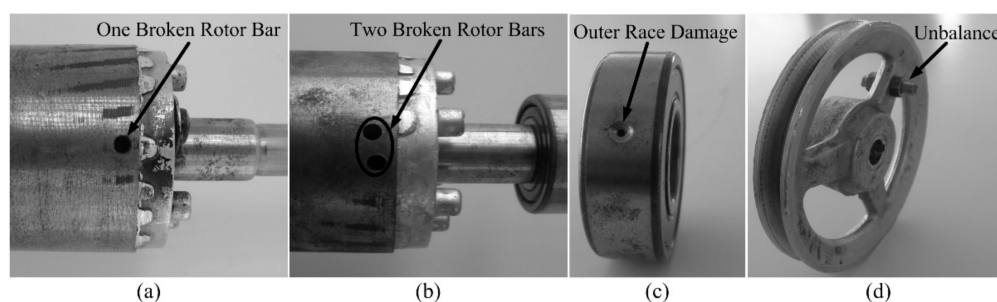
Artificially generated faults. (a) One broken rotor bar (1BRB); (b) two broken rotor bars (2BRB); (c) bearing with outer race damaged (BRN), and (d) mechanical unbalance.
